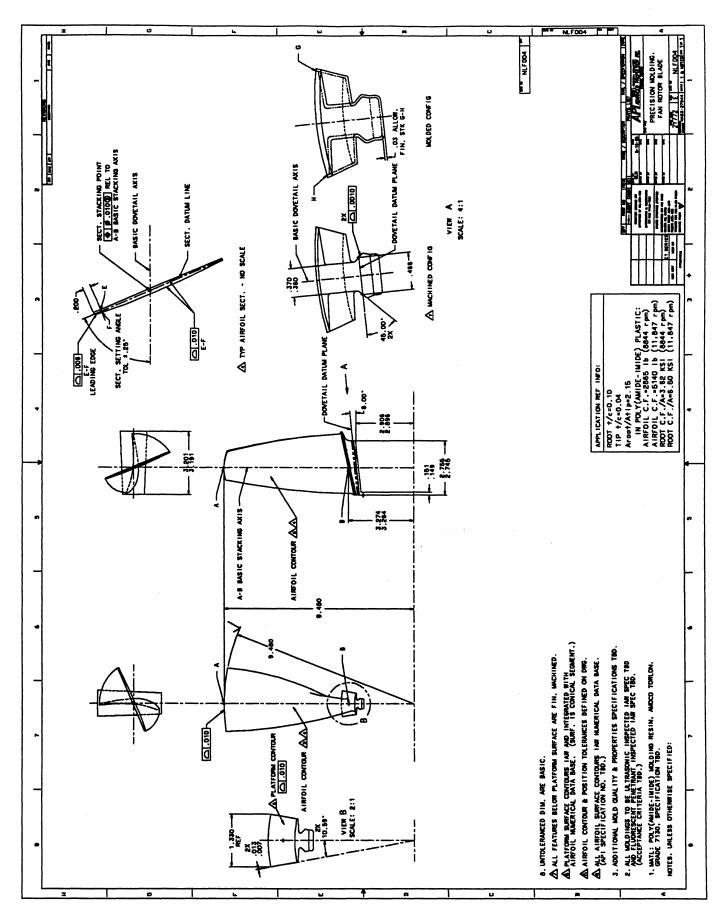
Precision molded Torlon fan blade preliminary manufacturing drawing.
